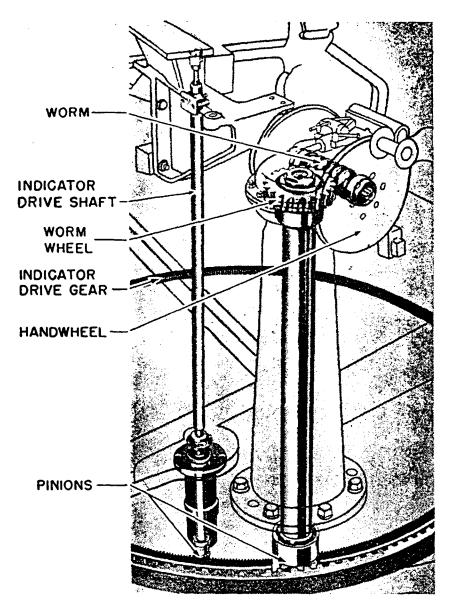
Traversing mechanism and indicator drive, 6-inch gun barbette carriage M1.
